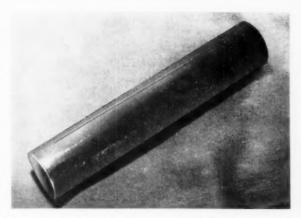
Note surface seam as indicated by magnetic inspection. (Retouched)
